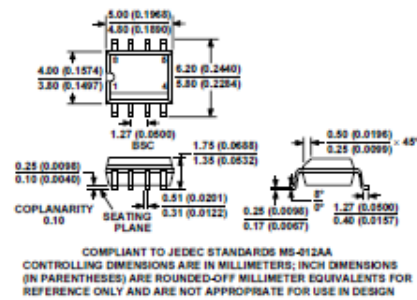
8-Lead Standard Small Outline Package (SOIC) Narrow Body (R-8)
